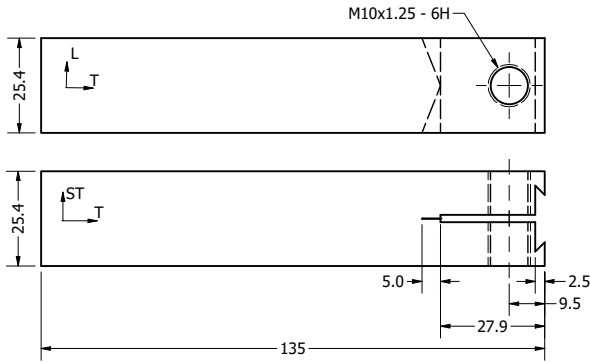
Drawing of the DCB specimens. Dimensions in mm.
